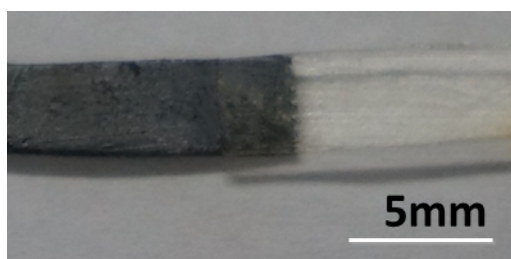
Welding of CNT-Vitrimer (thickness: 0.08mm) with non-CNT Vitrimer (thickness: 0.82 mm).
